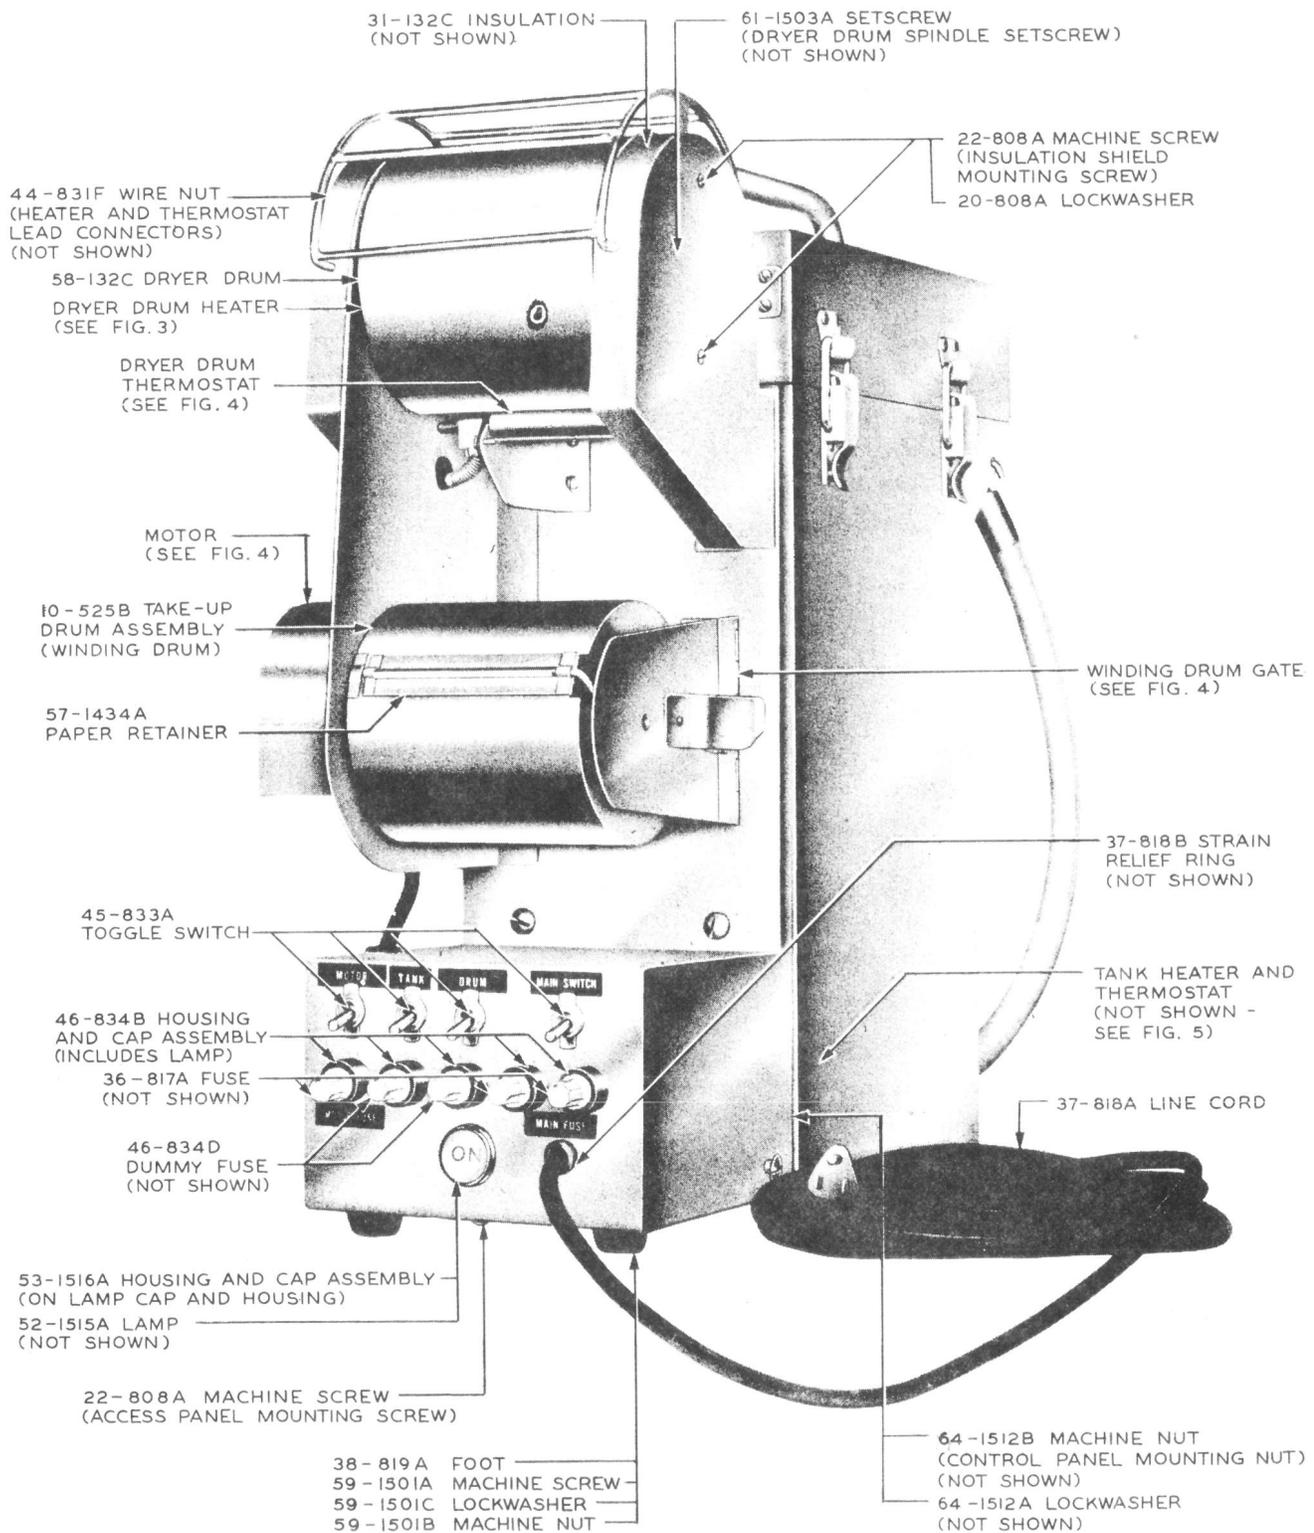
KS-14778 Photo Processor — End Cover Removed
